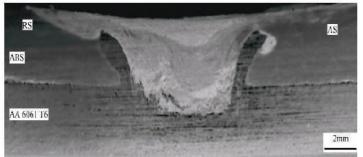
Cross-sectional view of joint welded at 710 rpm tool rotation, 14 mm/min feed rate and 20 mm shoulder diameter.
